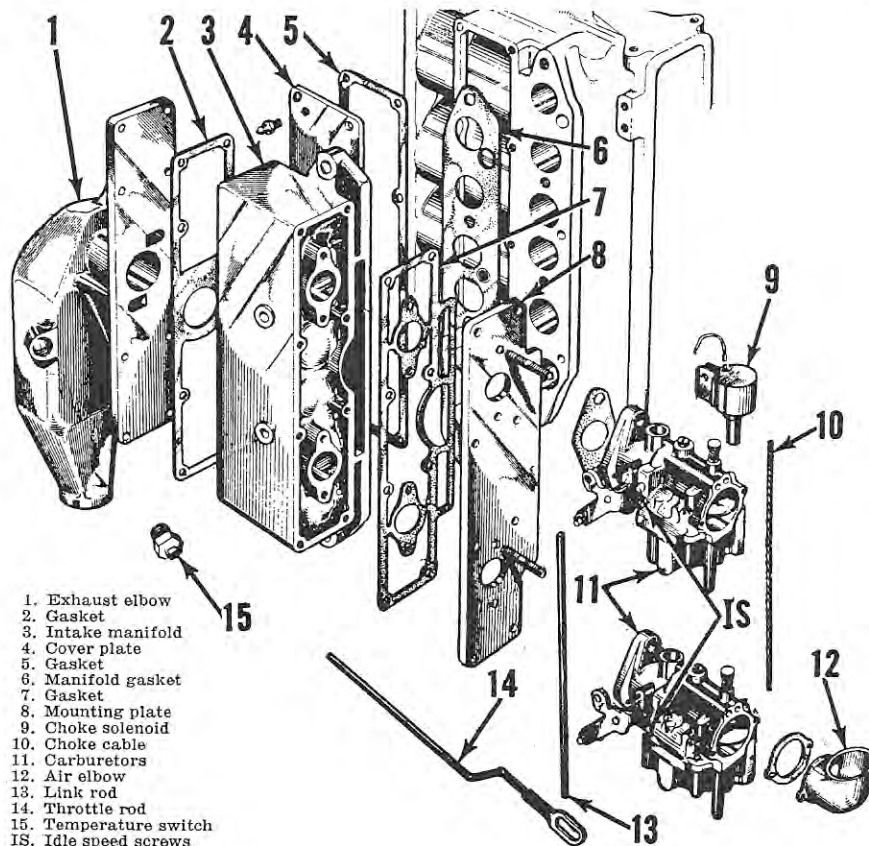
Exploded view of intake and exhaust manifolds showing component parts.
